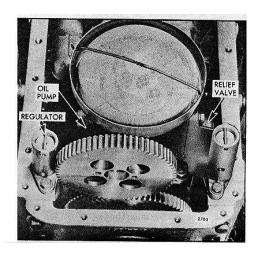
Regulator Valve and Pressure Relief Valve Mounting (12V Engine)
